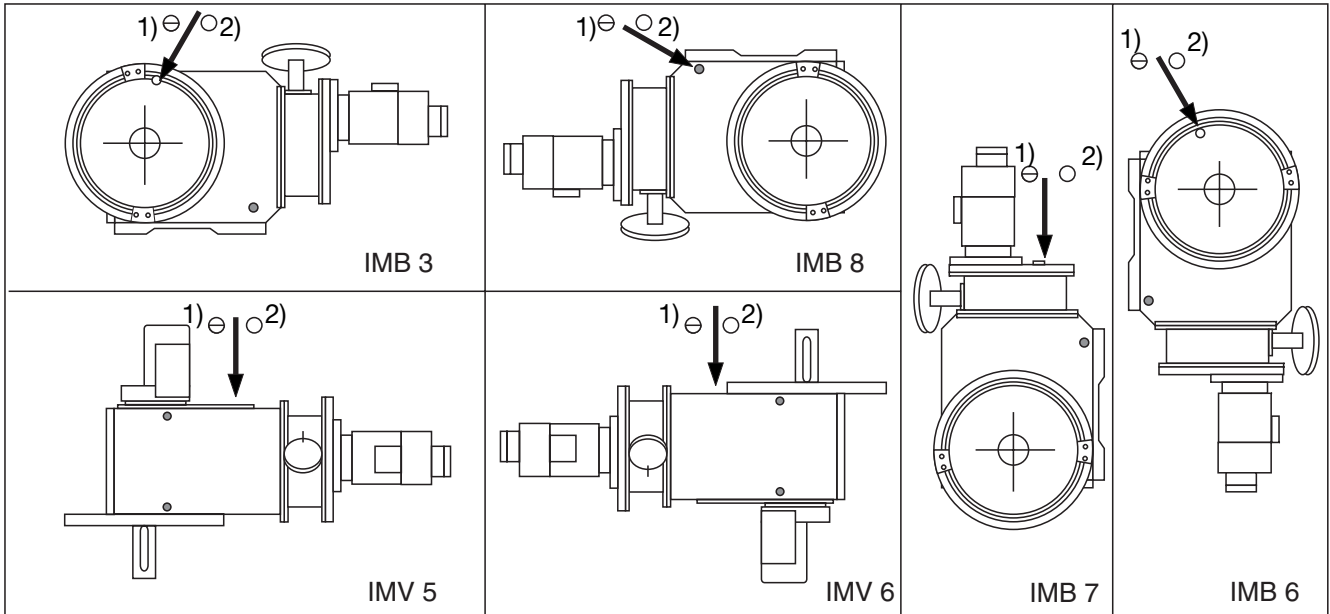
Mounting position RHD8000 / RHD16000; <sup>1)</sup> = inspection screw, <sup>2)</sup> = venting screw
